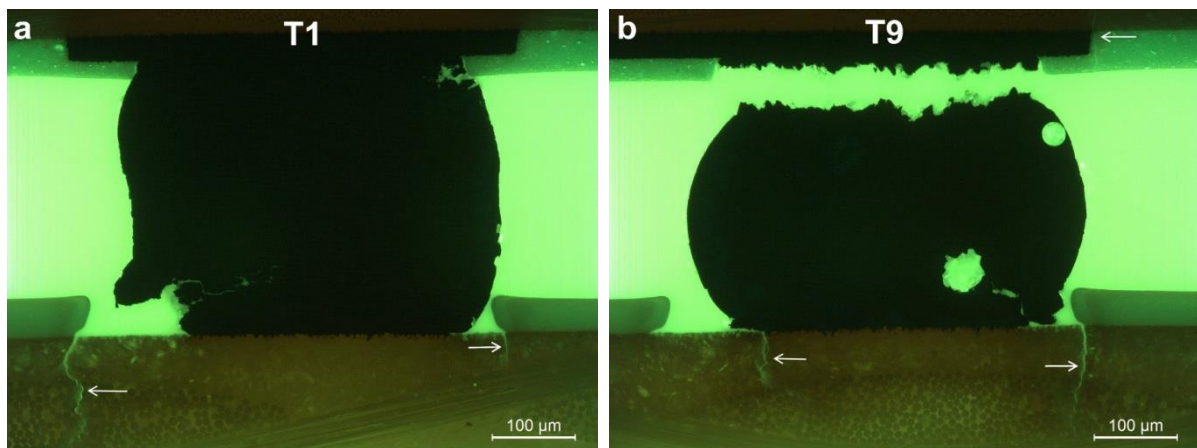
Cross-sections of solder joints a) T1 and b) T9 in the second row of solder joints (under the chip edge) to a BGA208 with SnPb solder joints showing cracks in the PCB and BGA laminates.
